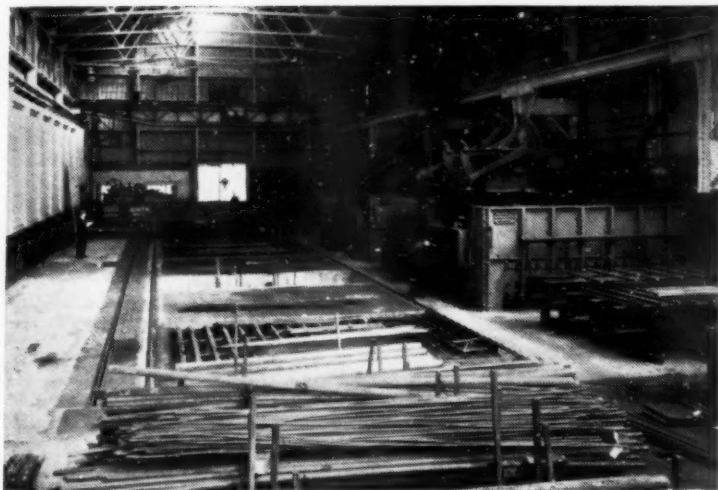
Heat-treatment section equipped with three town gas fired regenerative furnaces.
